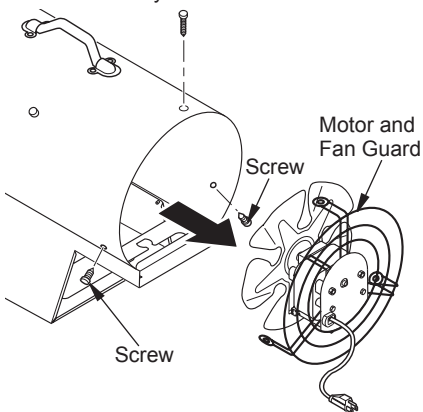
Removing or Attaching Fan Guard from Motor
